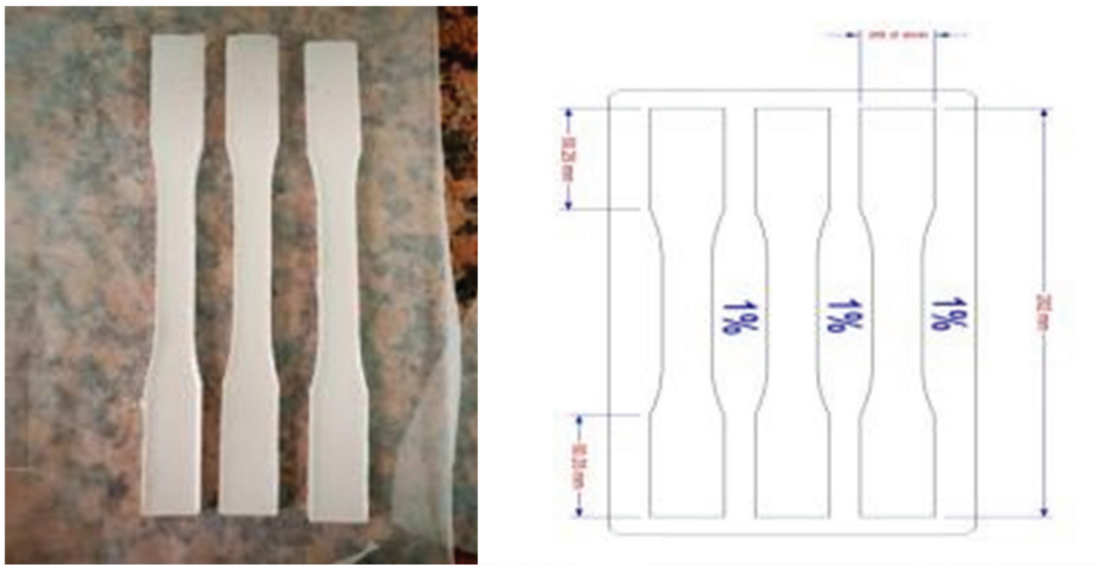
Shape, scheme and design of the specimen for elastic modulus
